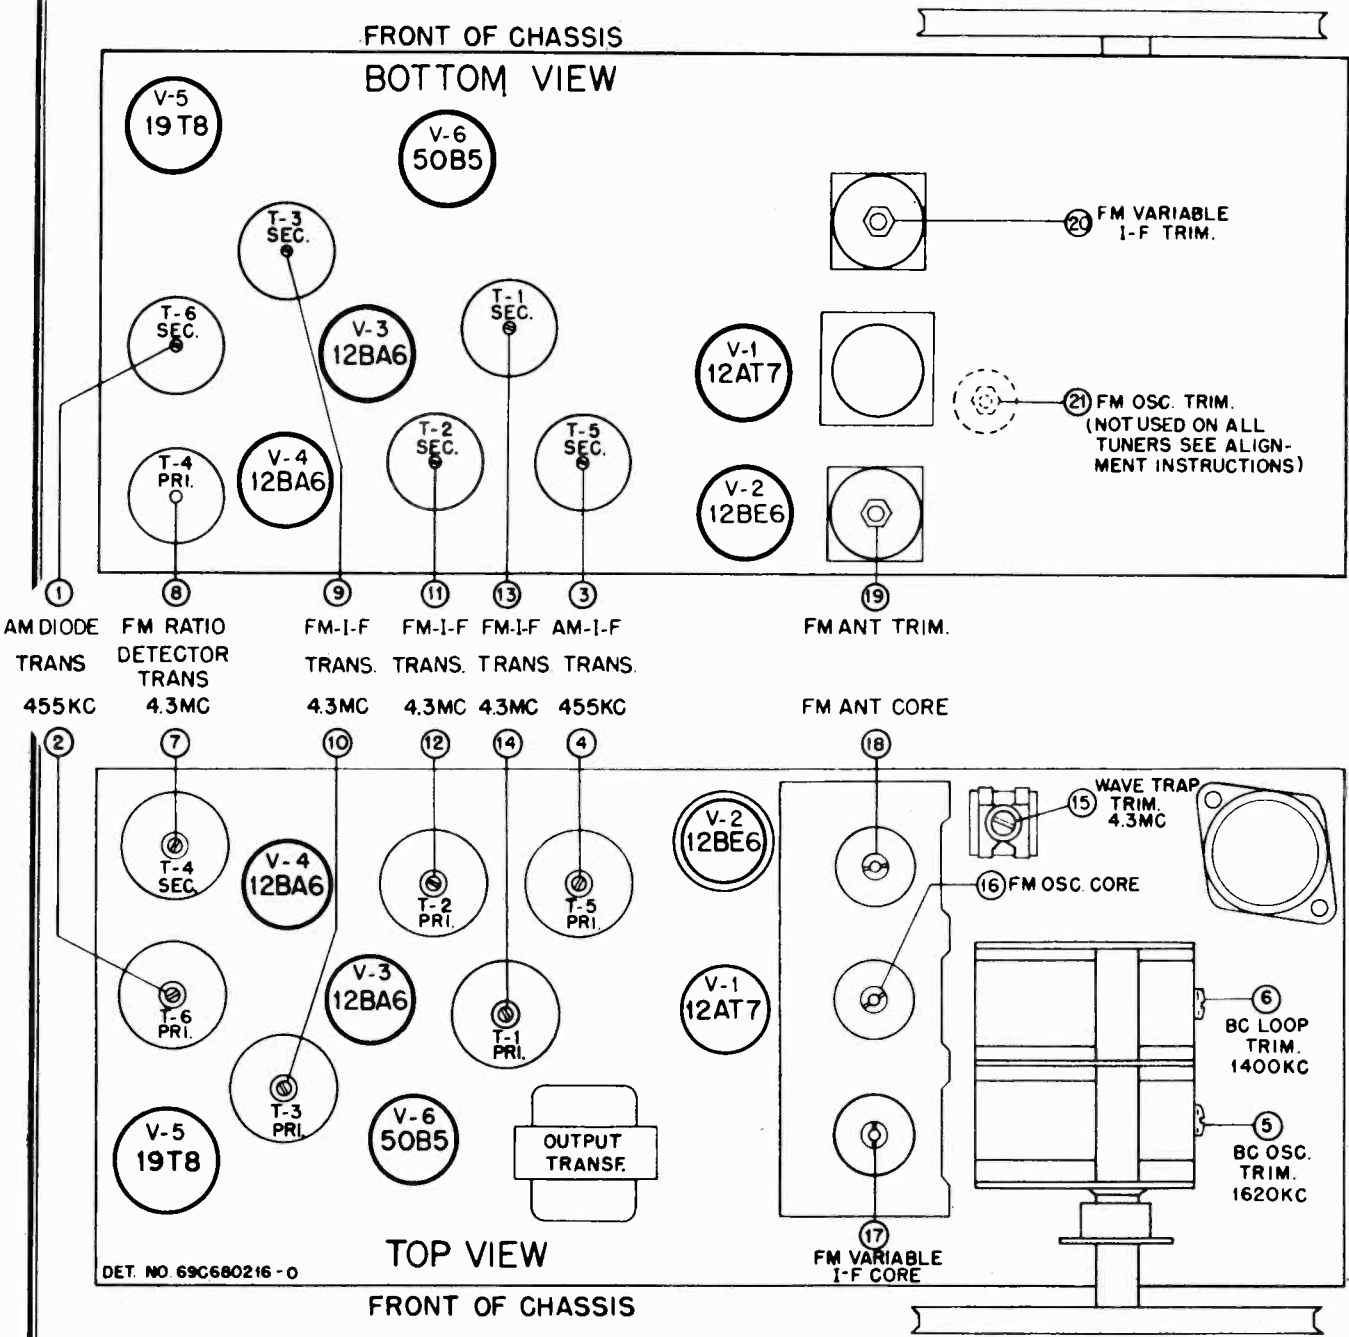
CHASSIS HS-128 & HS-132 TUBE & TRIMMER LOCATIONS
